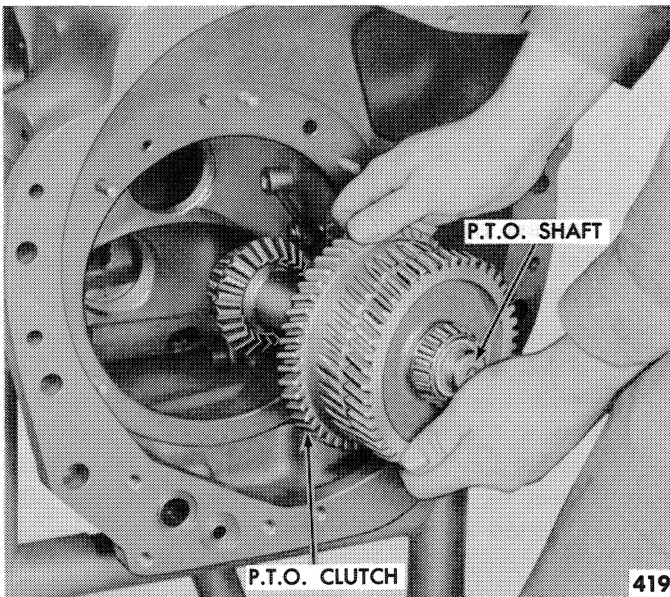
Removing the P.T.O. Clutch and Shaft—Model 81
